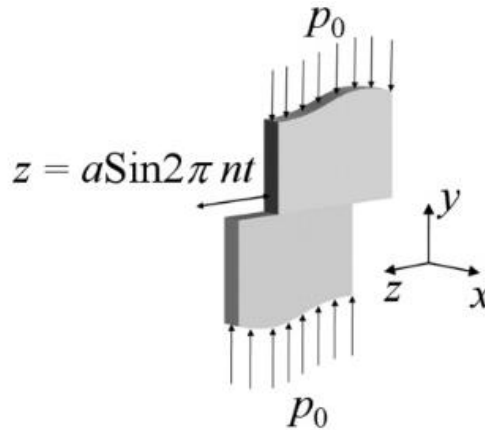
Schematic of the linear vibration welding [18].
